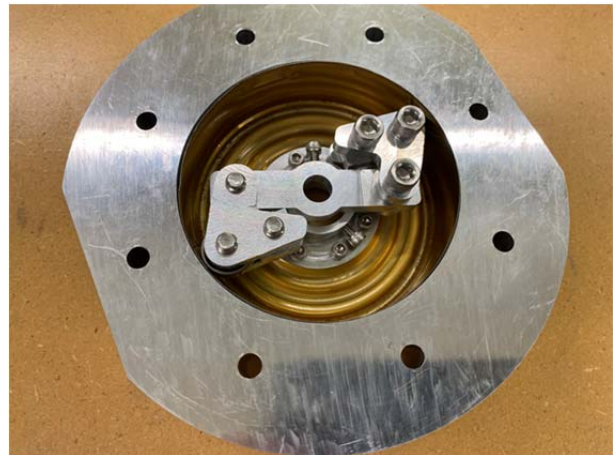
Mock-up arrangement of outer frame, flexspline, axle mount, and center section
